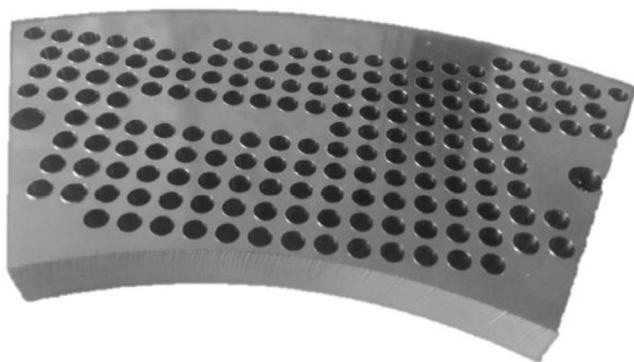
Shape of workpiece segment made of flat disc to perform a series of drilling tests
